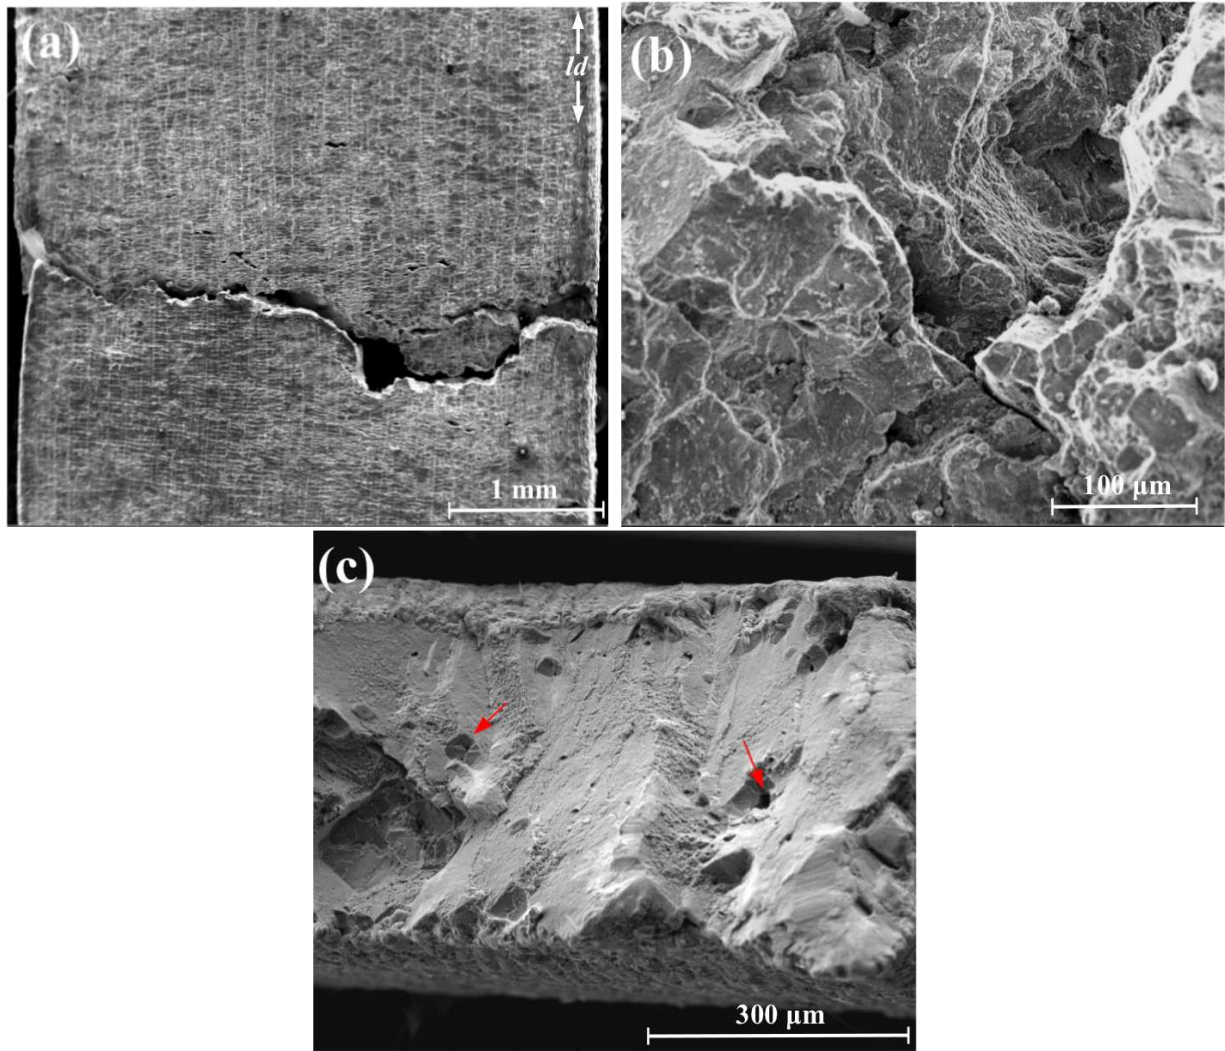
SEM images of the sheet specimen of thickness 0.51mm creep tested at 982°C/248MPa, (a) Specimen reconstructed after rupture (Loading direction is ld and thickness is into the plane); (b) Fracture morphology of the specimen in (a) showing ductile fracture (Loading direction is parallel to the Viewing direction); (c) Fracture morphology of the specimen in (a) showing cleavage steps (Loading direction is parallel to the Viewing direction).
